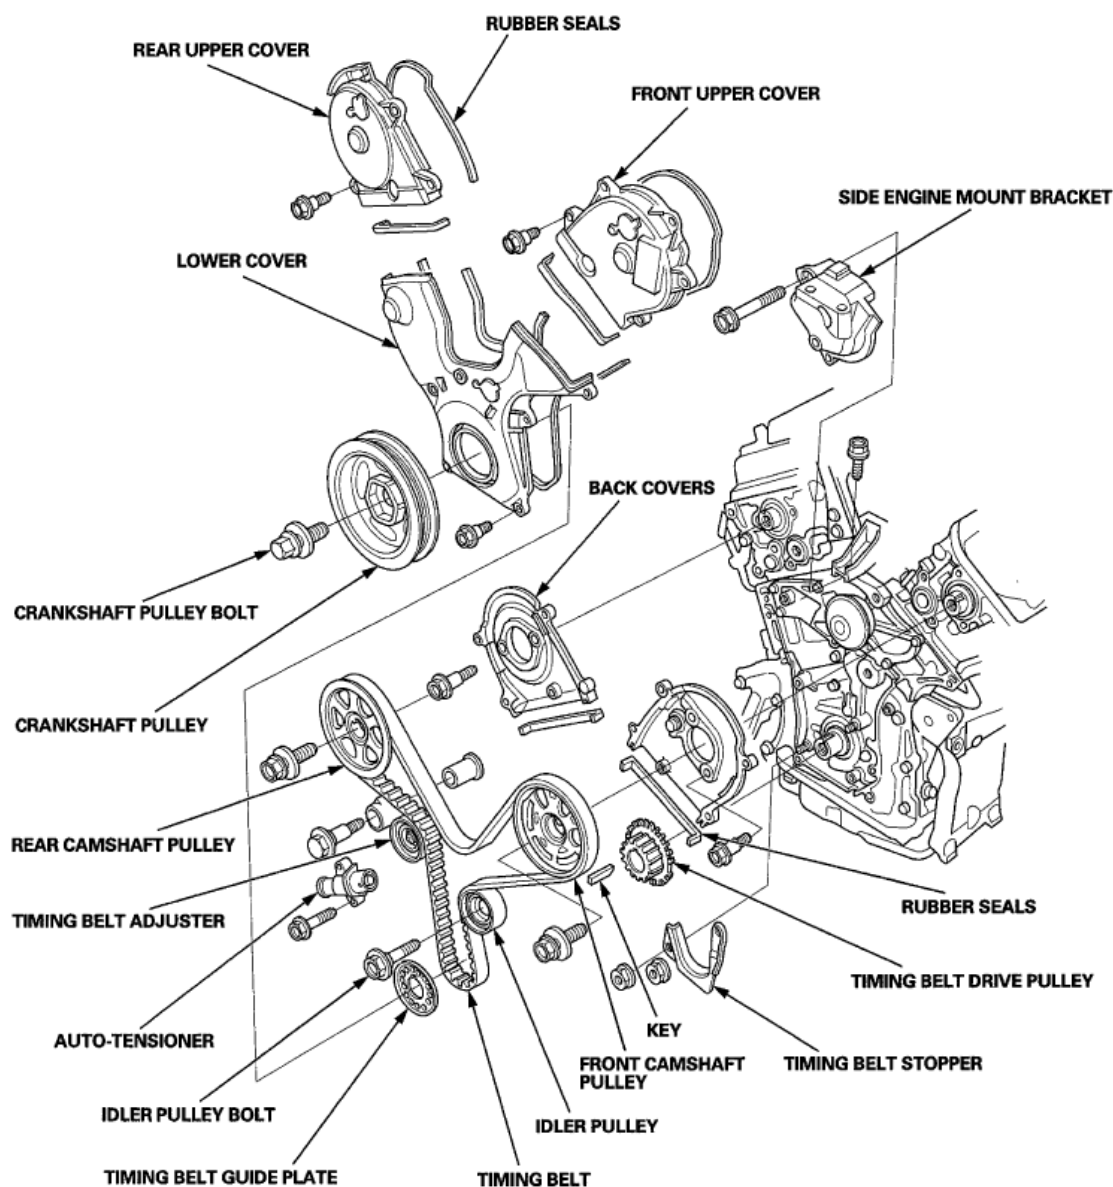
Exploded View Of Crankshaft And Timing Belt Drive Pulley Replacement Components Locations
